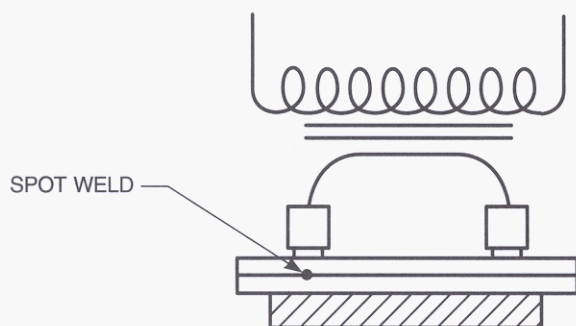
Example of a Resistance Spot Weld Made with Indirect Welding
